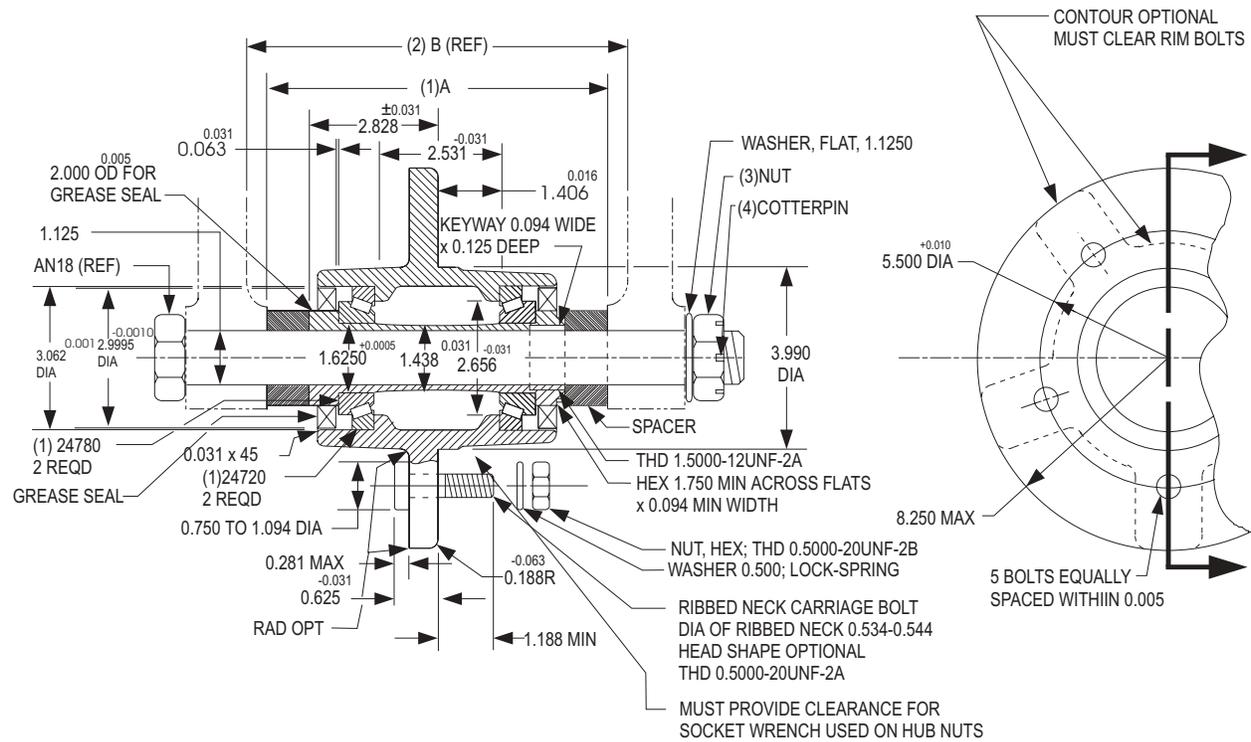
Hub assembly, cantilever mounting, for 6.00-9, 7.50-10, and 9.00-10 wheels
